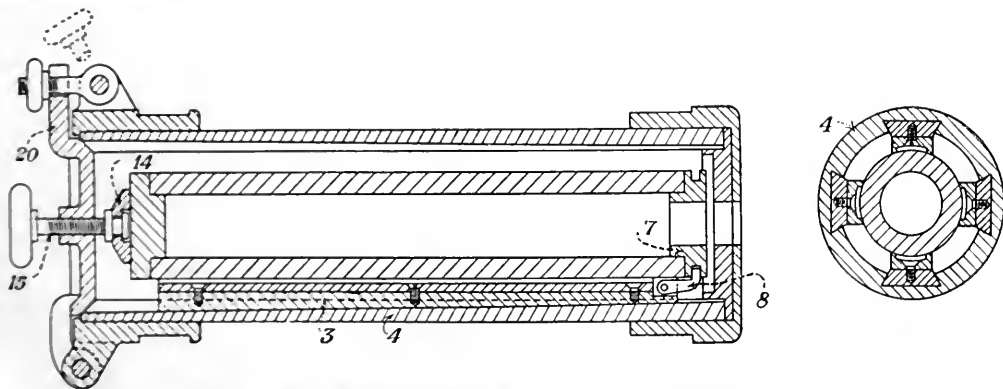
SPINNING MACHINE FOR USE WITH REMOVABLE MOLDS, HEAVY TYPE
